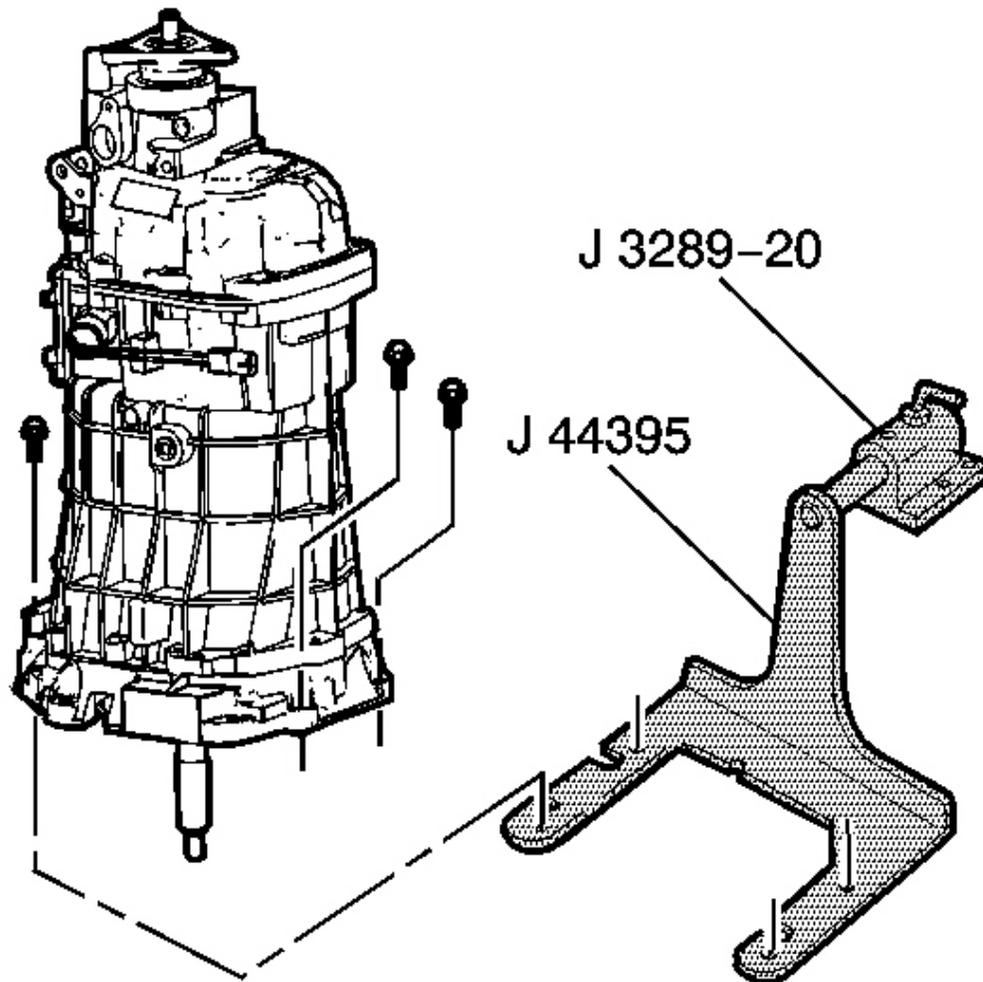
Installing/Removing Transmission On J 44395 & J 3289-20
